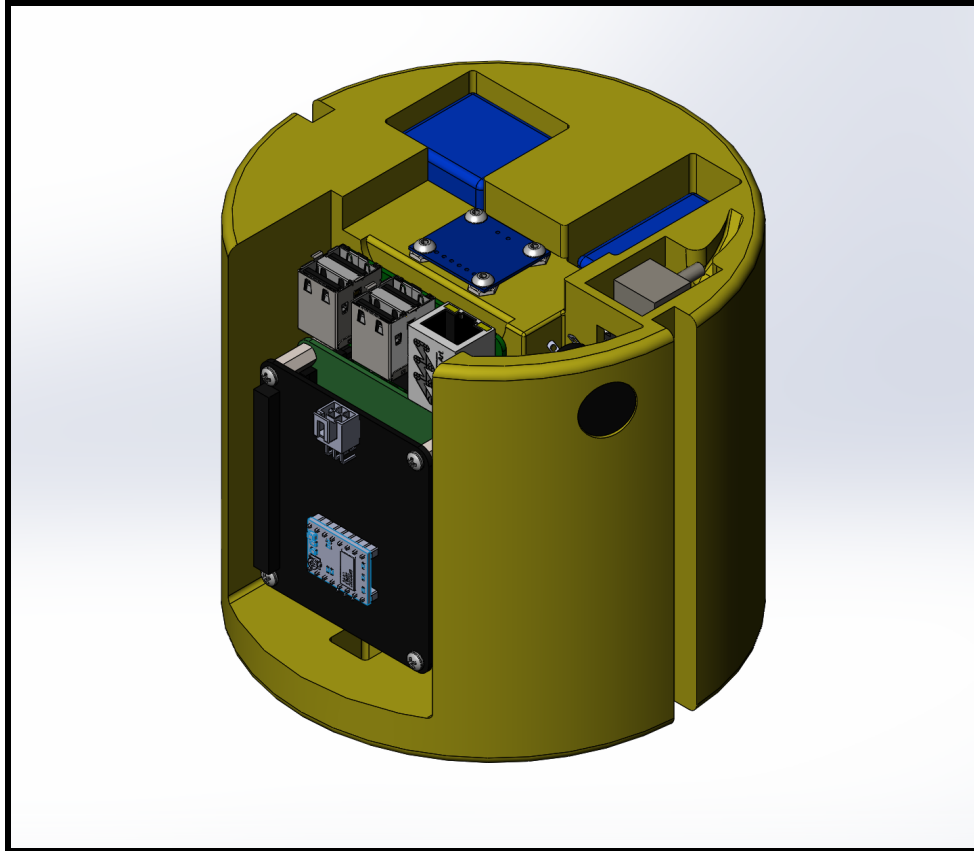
ATS Section Avionics Assembly Isometric View
